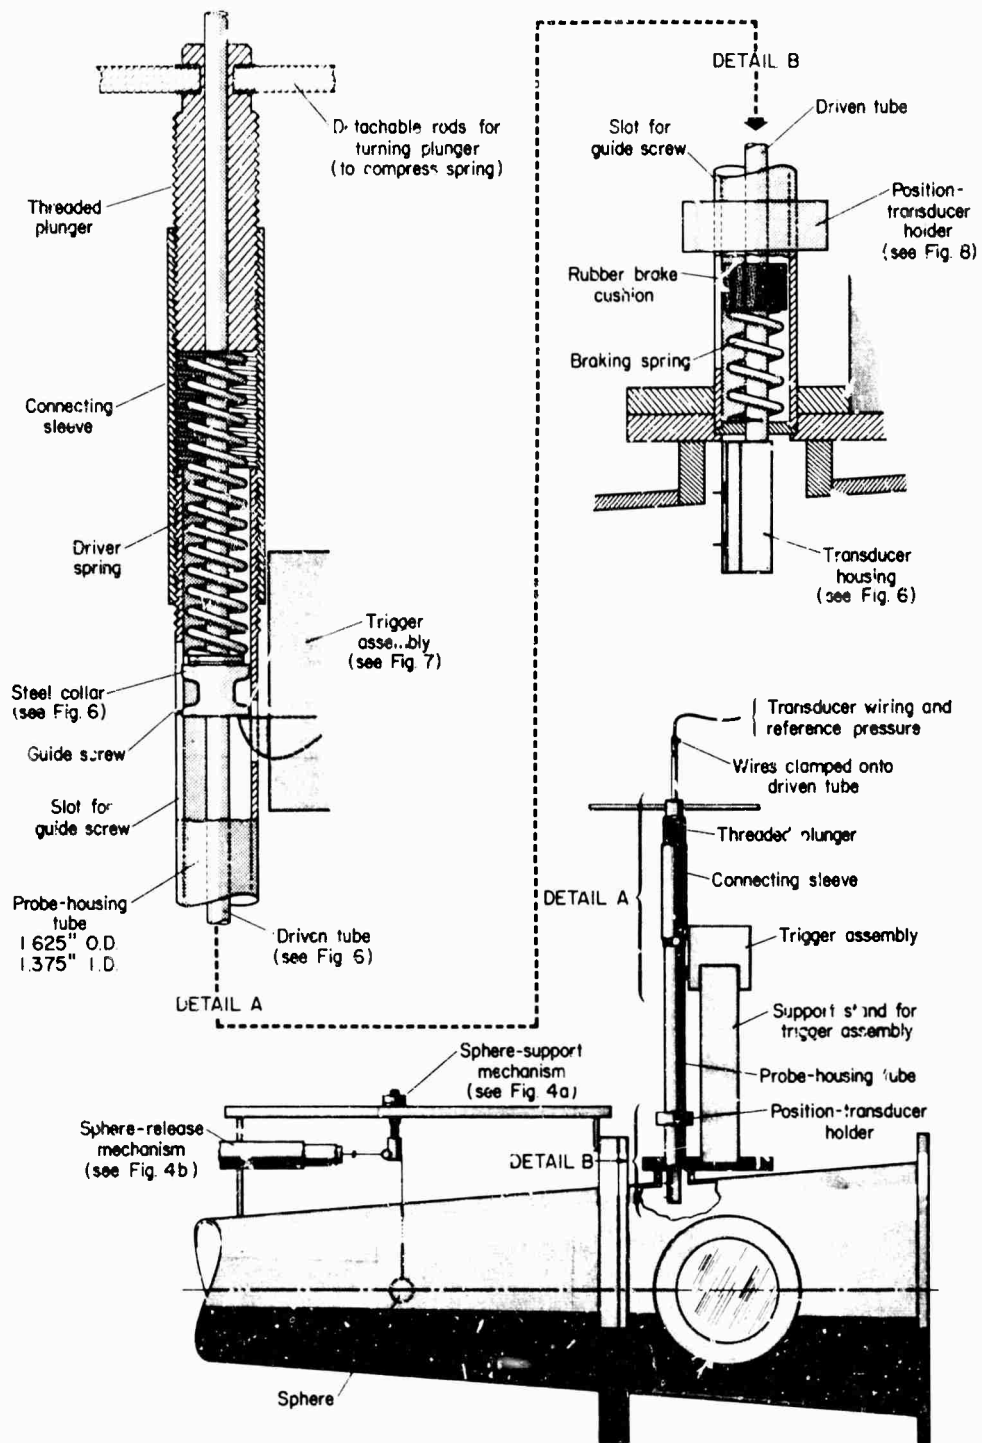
Vertically transversing probe (in loaded position) mounted on tunnel test section.
